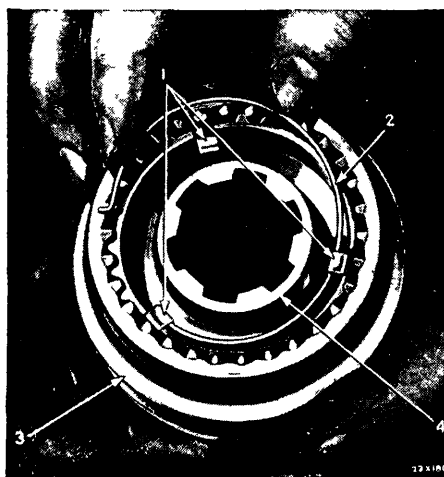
Installing synchronizer shifting plates and spreader spring on 1940-52 standard transmission. 1. Shifting plates. 2. Spreader spring. 3. Clutch sleeve. 4. Clutch gear
